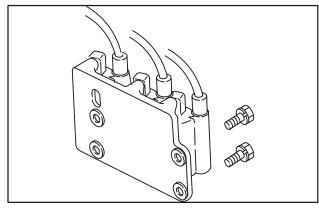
Install Ignition Coil Bracket And Ignition Coils
